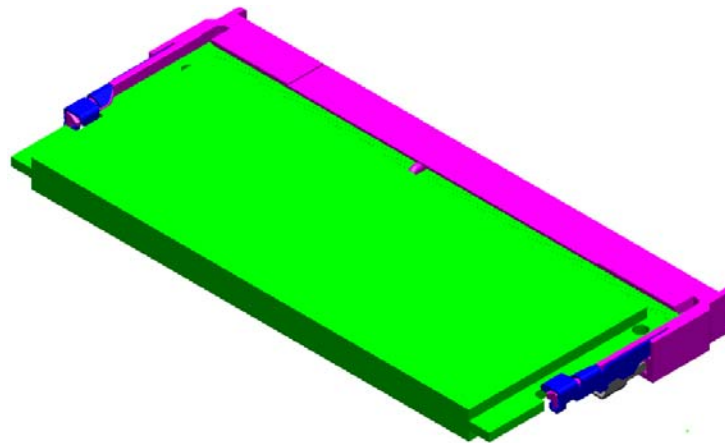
SODIMM DDR4 Module and Socket
